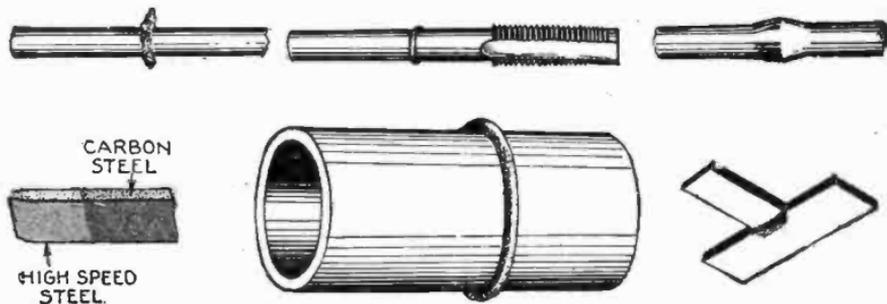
,119 to 8,124.—Various examples of butt welds. Fig. 8,119, flash weld; fig. 8,120, tool weld; fig. 8,121, upset weld; fig. 8,122, high speed steel weld; fig. 8,123, pipe weld; fig. 8,124, tee weld.
